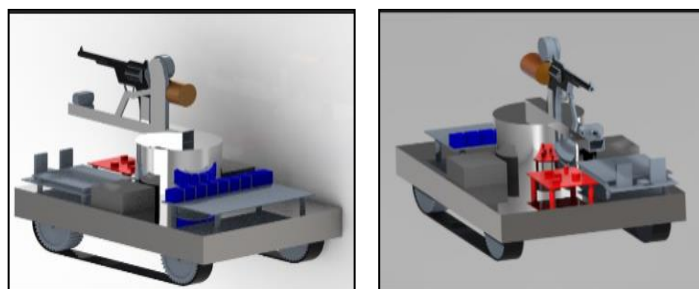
3D design of the robot (a) Side view, (b) Front view
